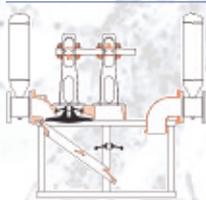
Removal of intermediate housing for access to suction trunnion and discharge disc. Housing is hinged to discharge housing allowing for easy removal.
